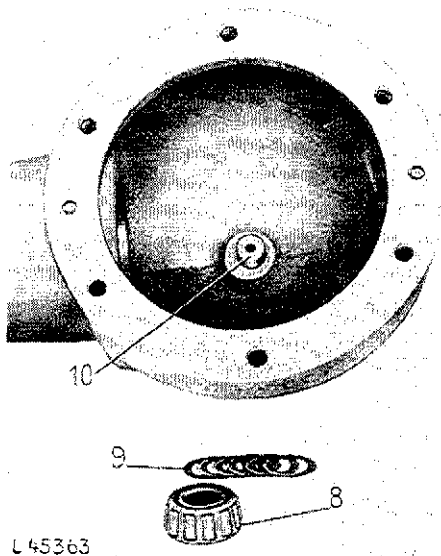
Removing Bearing Cone and Shims from Inner Bearing Pin
